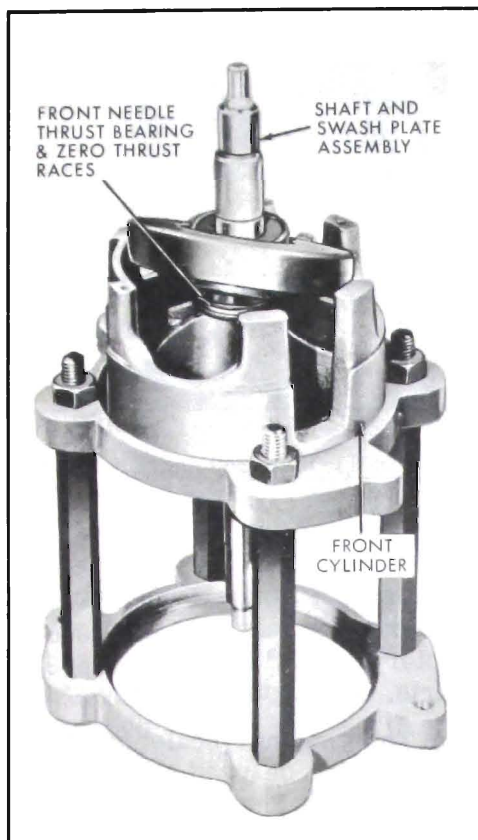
Shaft Assembly and Front Needle Thrust Bearing and Races in Front Cylinder Half
